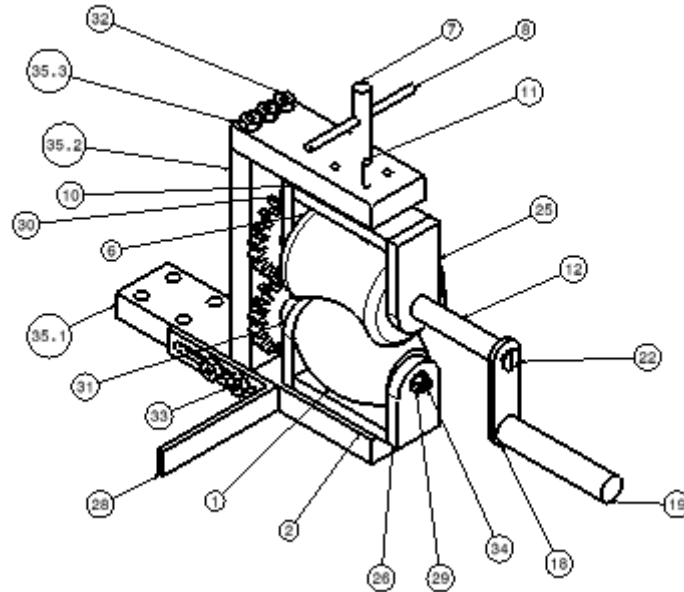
Isometric view of shaping tool with gears, concept3 (details are mentioned in Annexure V)
